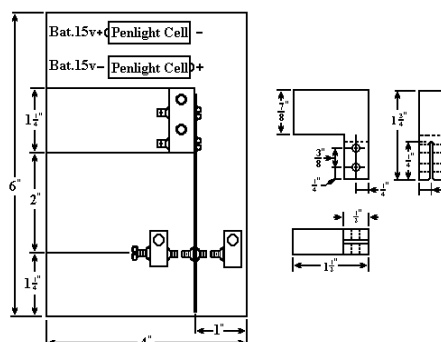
shows the layout and measurements of the paddle key. The keyer lever is a hacksaw blade  $4\frac{1}{3}$  inches long. The tension of this blade can be adjusted by coating it with a small amount of solder until it is satisfactory. The contact on the blade is a  $\frac{3}{4}$  inch screw with the head removed and mounted with two nuts as shown.
